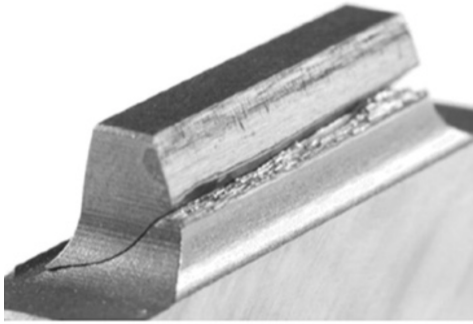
Tooth flank fracture (Boiadjiev et al., 2014)
